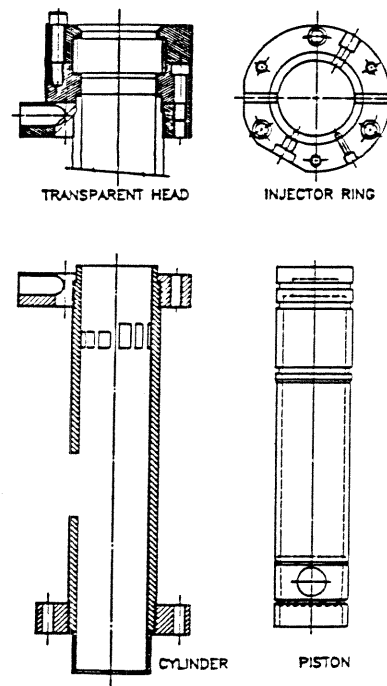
Piston, Cylinder, and Cylinder Head Assembly.
